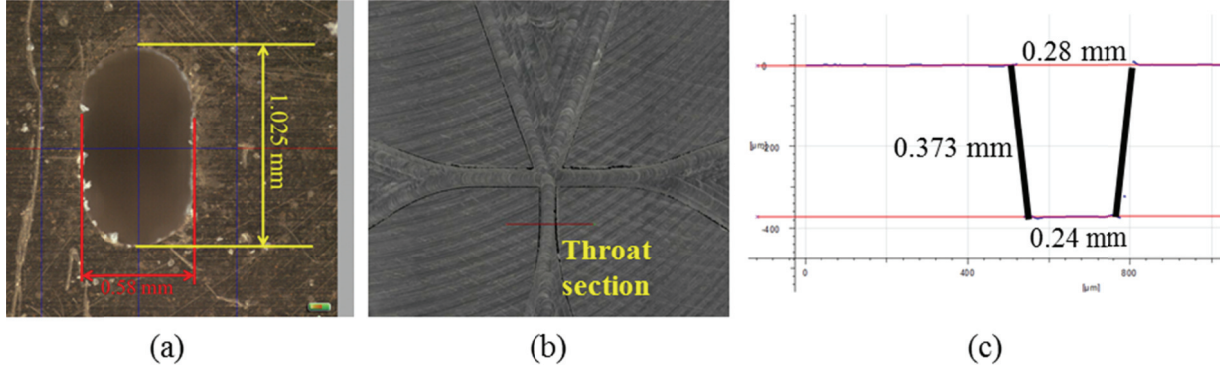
Verification of the oscillator's key dimensions on a 3D measurement machine Alicona InfiniteFocusSL. a) dimensions of outlet slot; b) indication of the throat section location; c) dimensions of the throat cross-section
